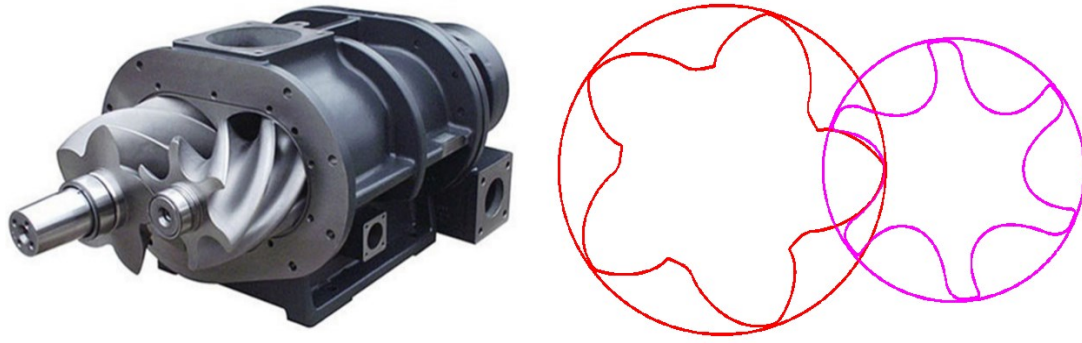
screw machine; left: actual device; right: rotors profile (from [32])
